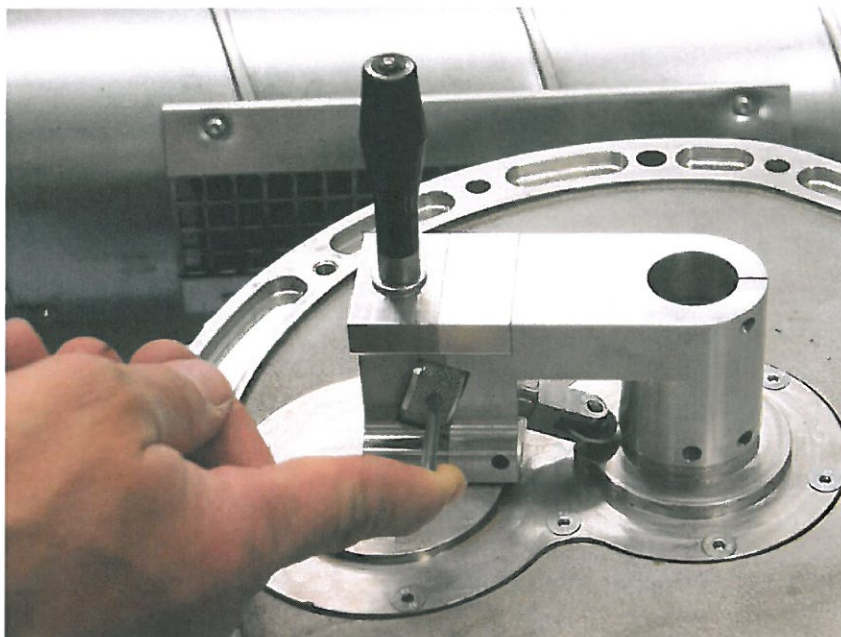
Turn the adjustment wheel to feed the cutting tool
